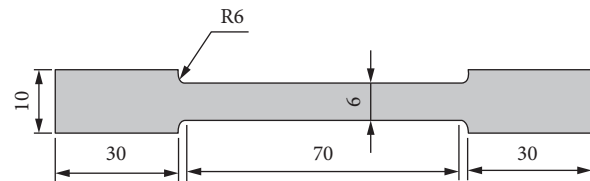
Geometrical shape with dimensions of the tensile specimen (All dimensions are in mm).
